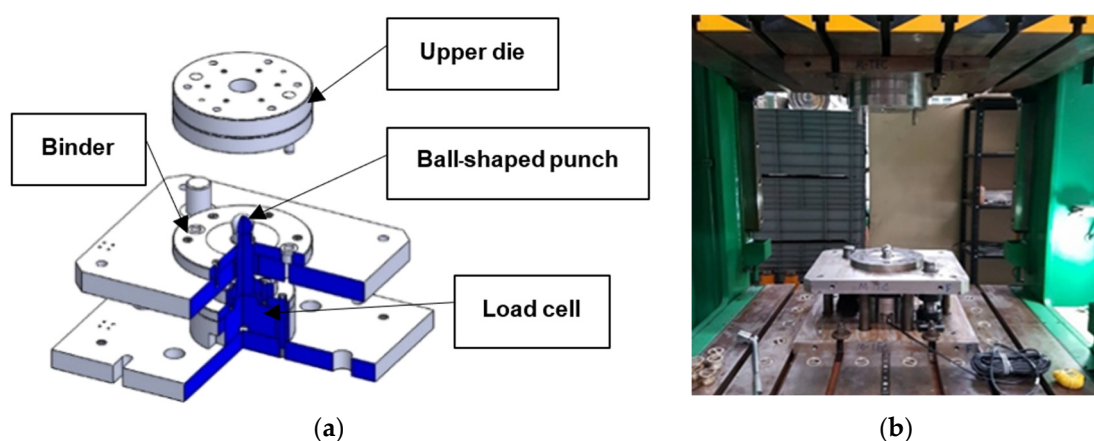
Tooling for experiment: (a) tooling components; (b) die set of ball ironing test.
